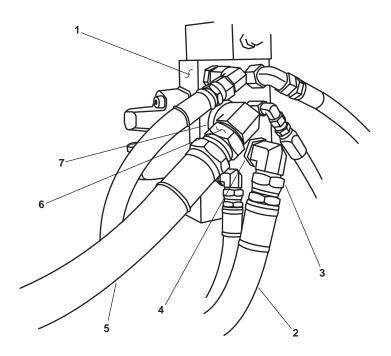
Direct Connection Manifold with Hydraulic Hoses
